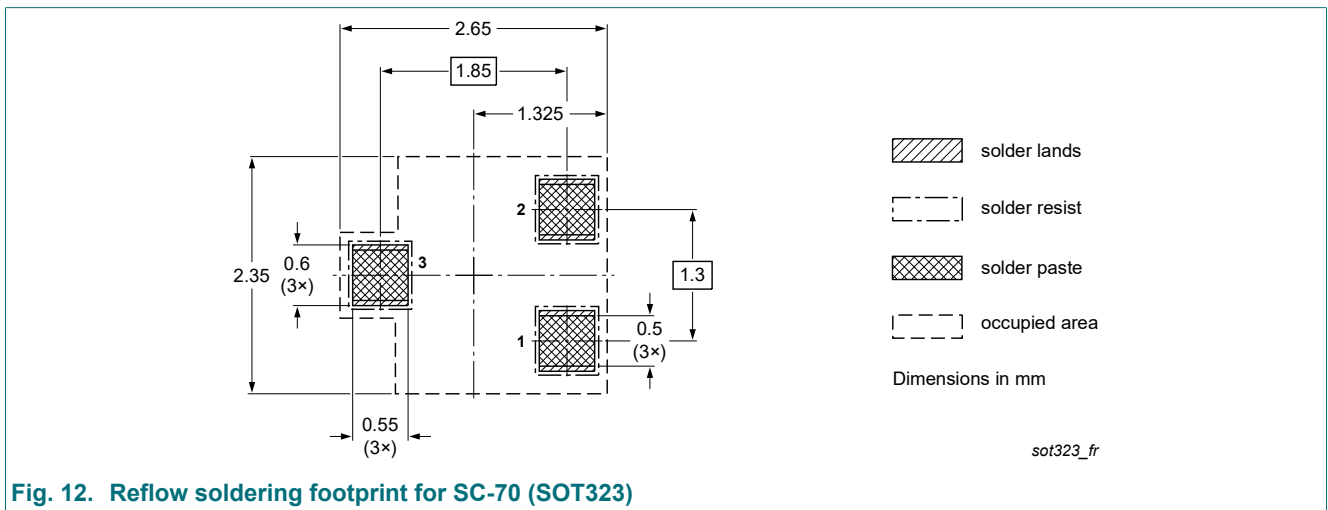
Reflow soldering footprint for SC-70 (SOT323)
